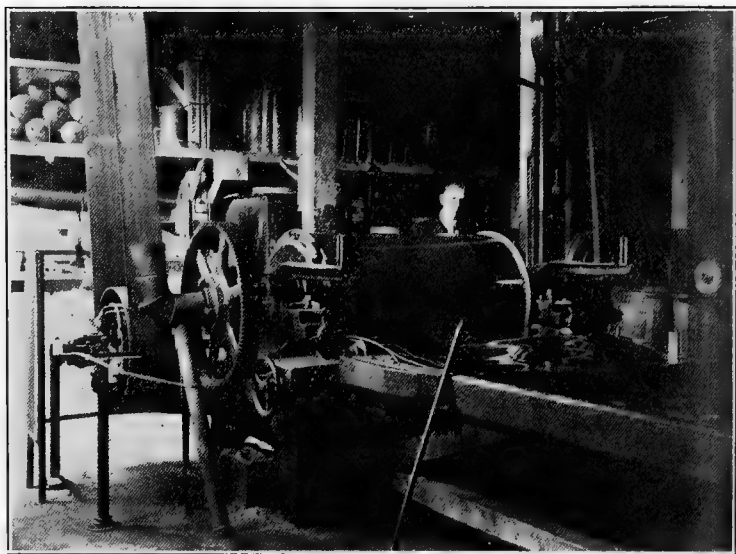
Loading Mandrel of Lathe with Sheet Zinc.
